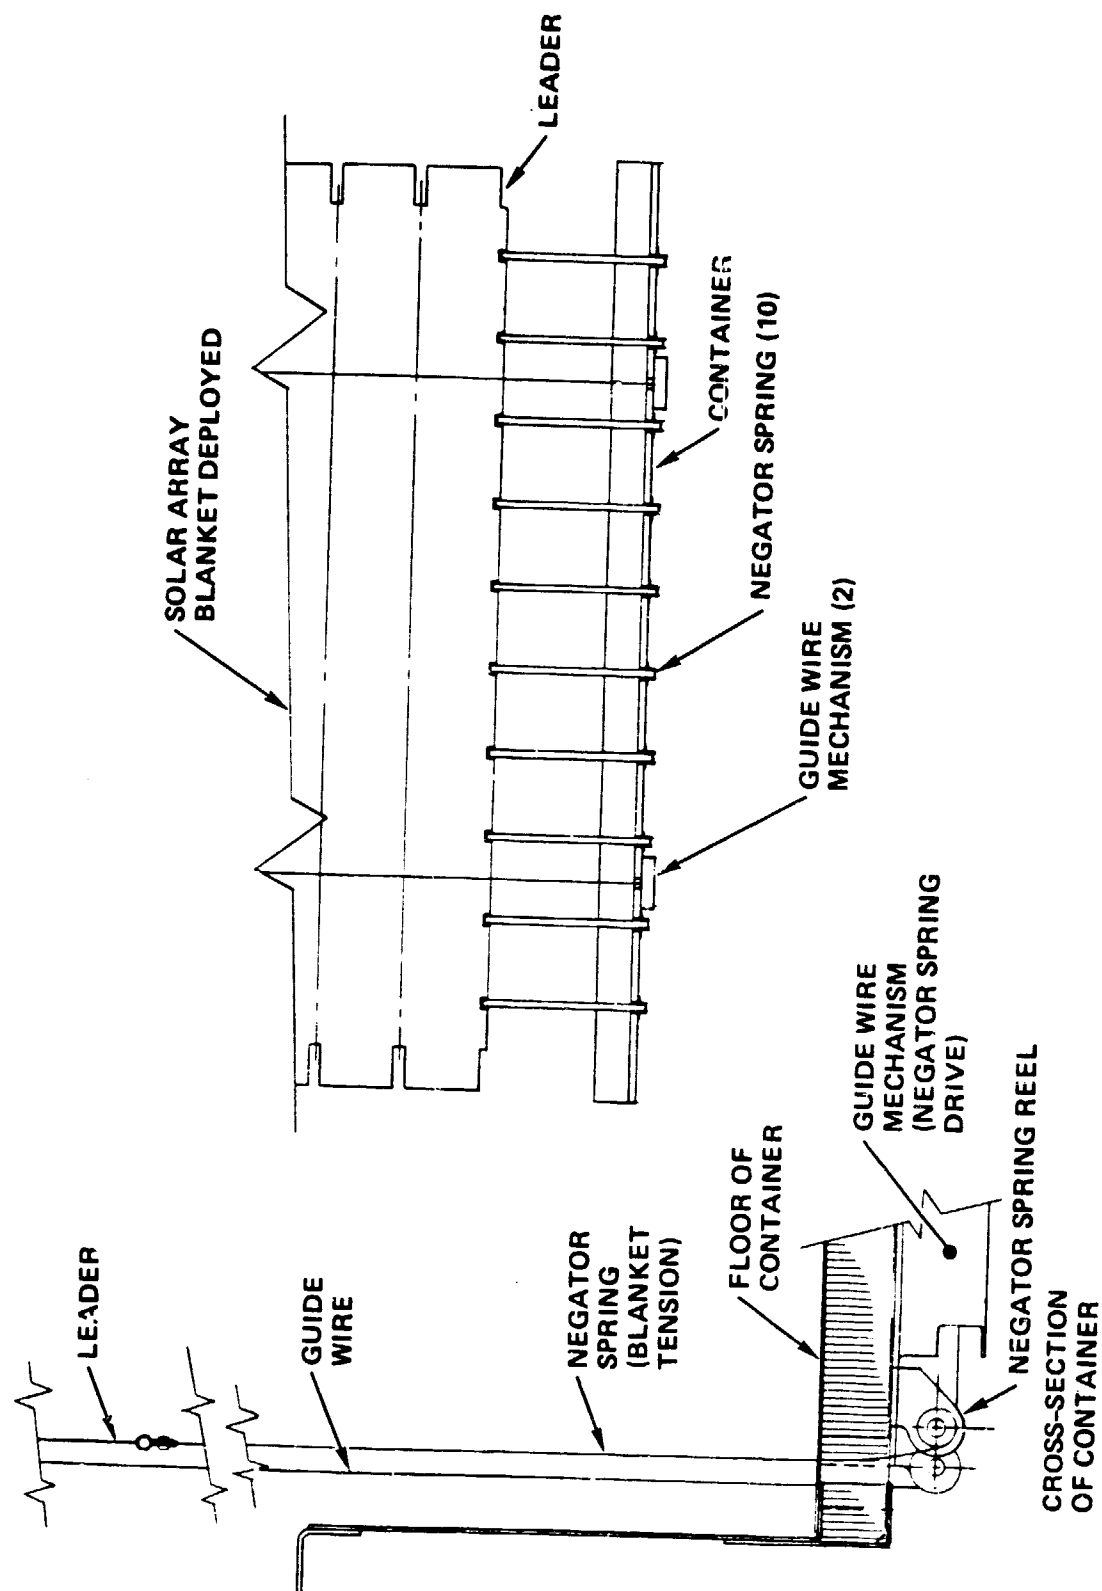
Blanket Tensioning and Guide Wire Mechanism
